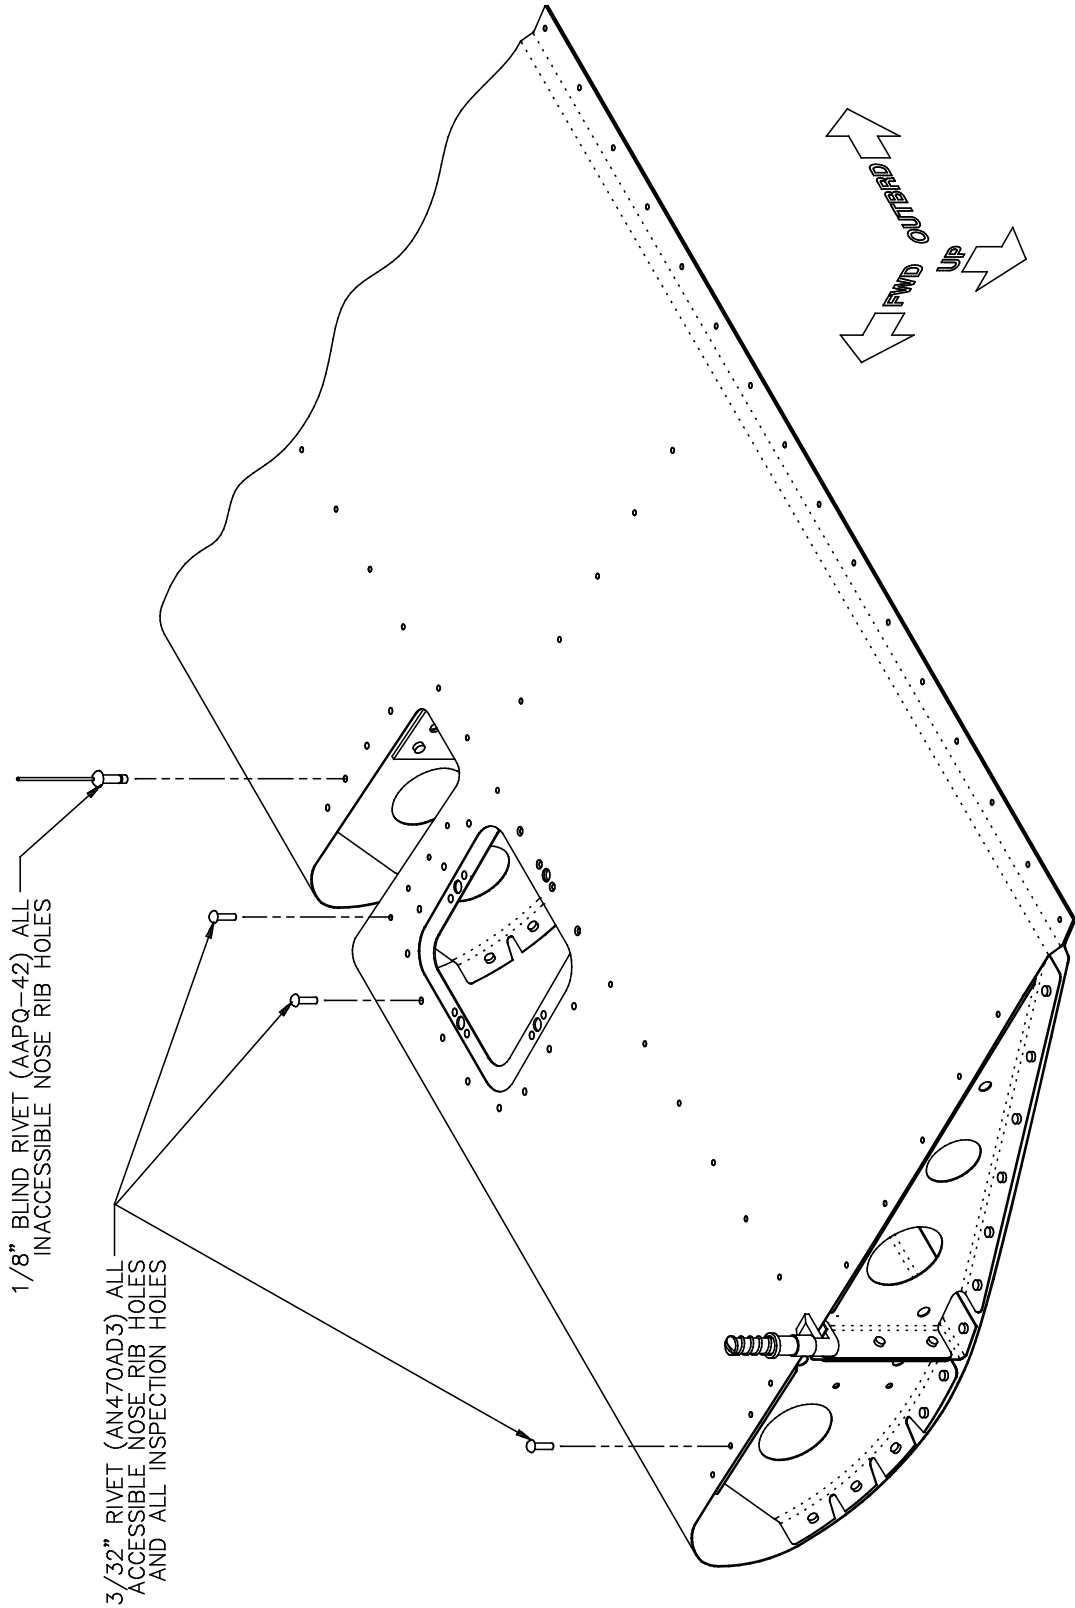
Riveting the Skin to the Lower Flanges of the Nose Ribs
